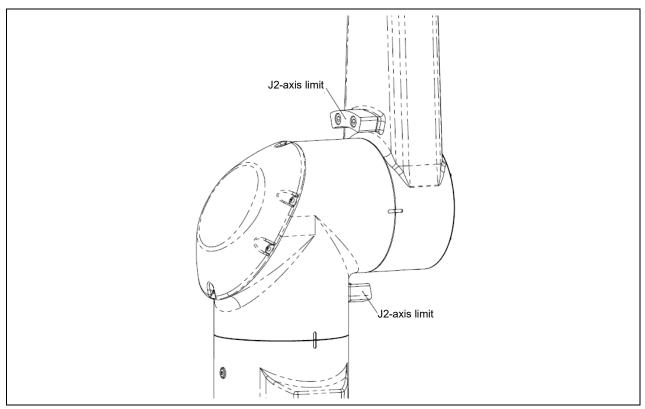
J2 Axis brake position (ER10-900-MI/HI)
